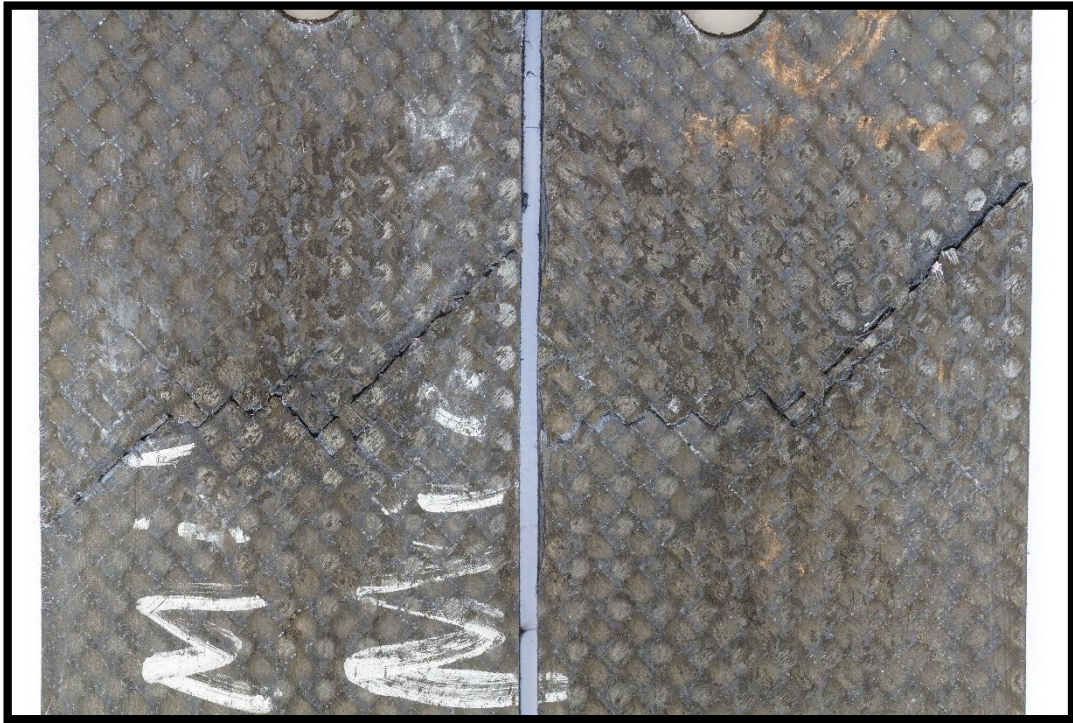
Middle Toe Layer used for Fatigue Testing. Layer was removed after 450,000 cycles. This toe layer was a Soft Layer. Photo courtesy of Aaron Nystrom.
